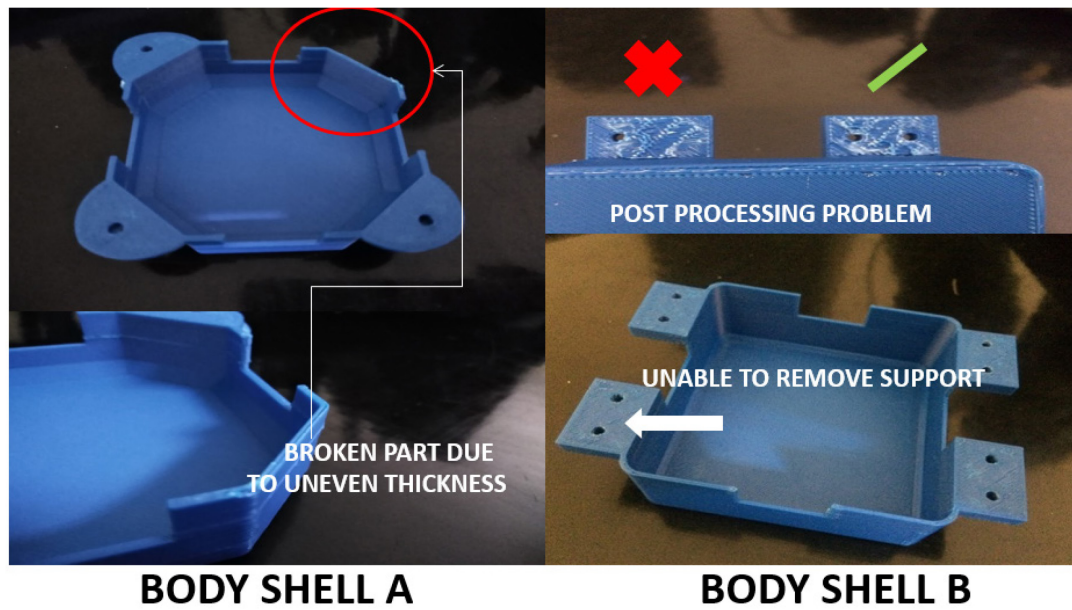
Problems encountered in modular design test print of drone fuselage housing.
